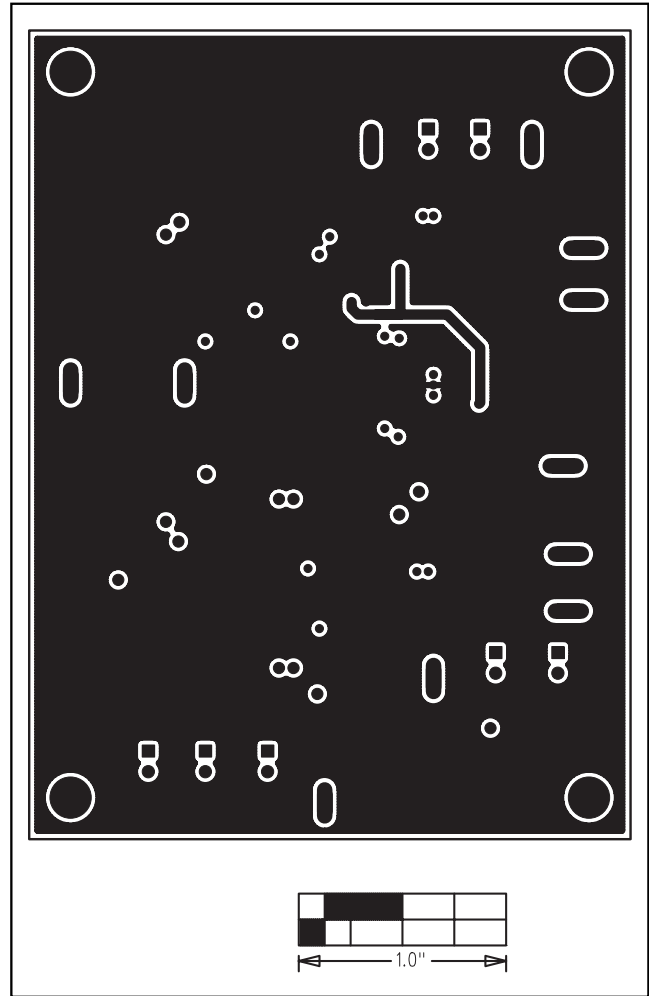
MAX1537 EV Kit PC Board Layout—Layer 3
